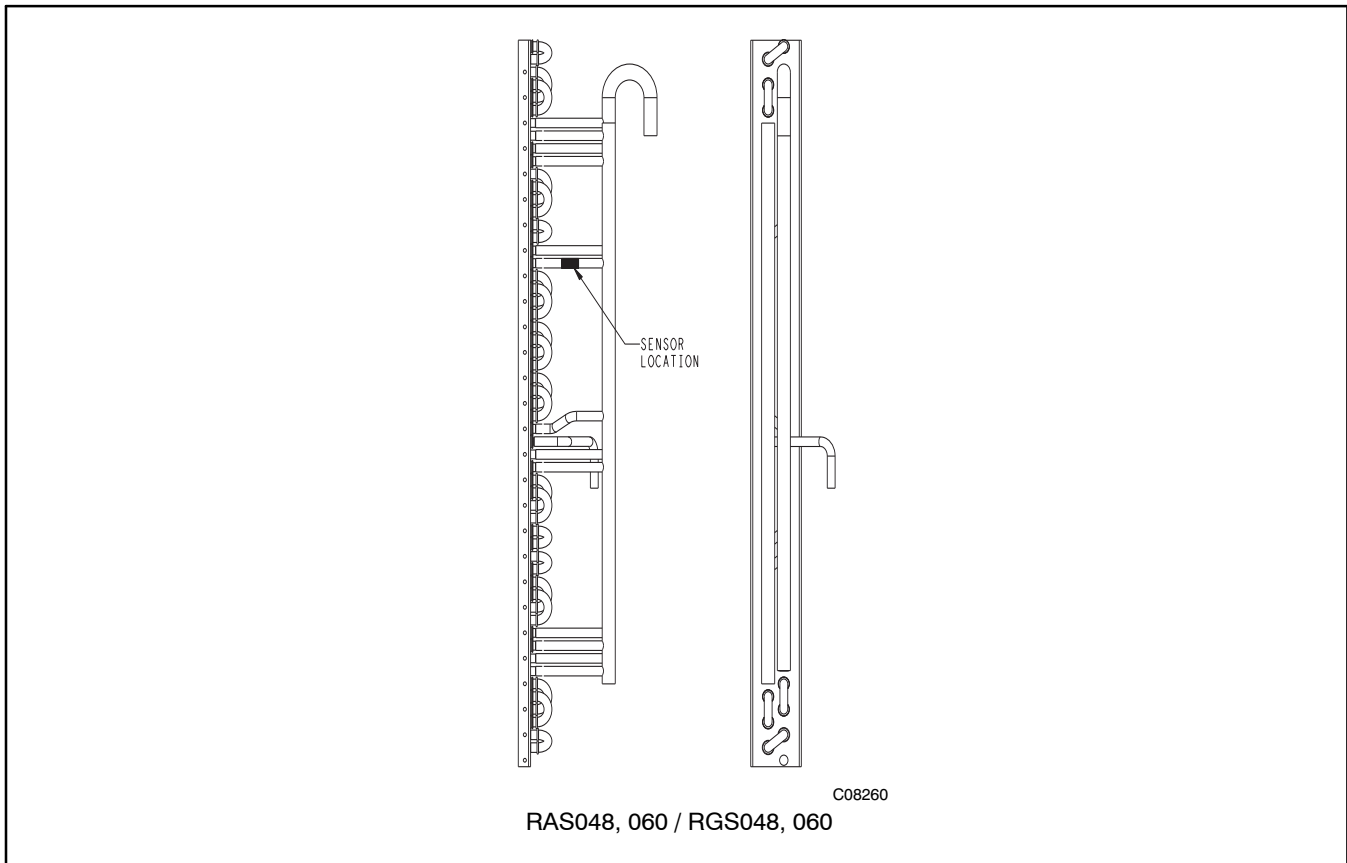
Motormaster® II Sensor Locations – 4 and 5 Ton Cooling Units
